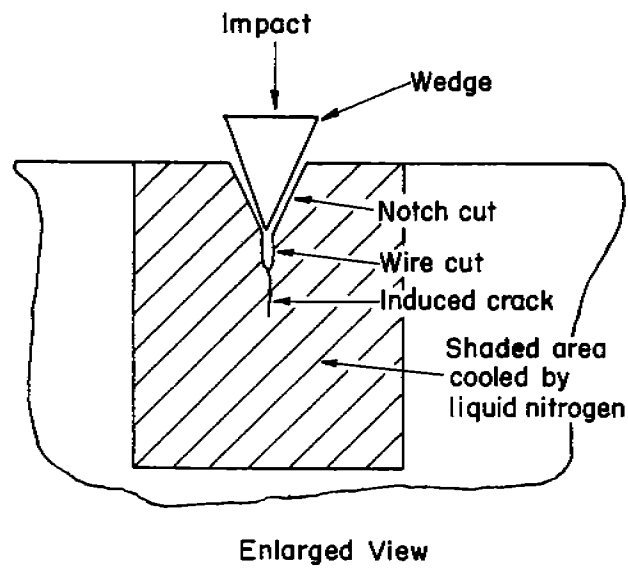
TENSION IMPACT SPECIMEN SHOWING METHOD OF INTRODUCING CRACK (25)
